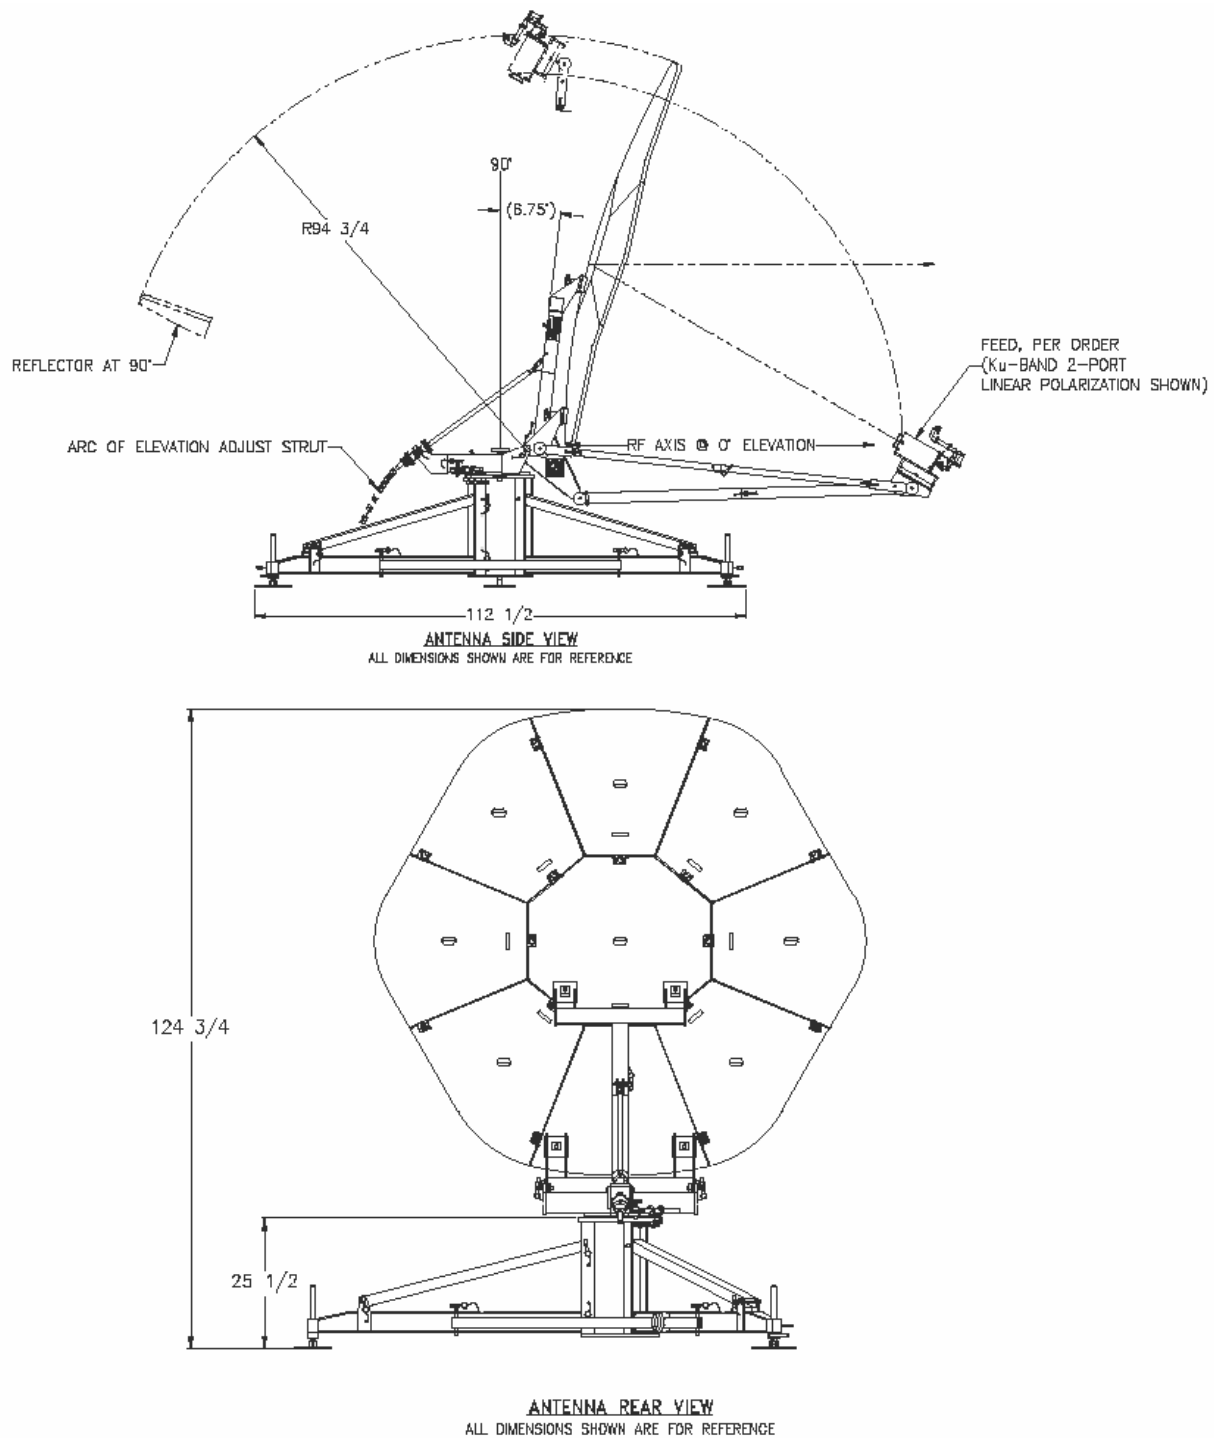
Mechanical Dimensions of the 2.4m Antenna
